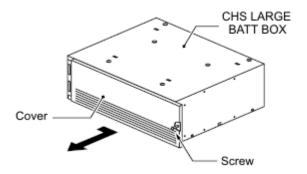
Removing CHS LARGE BATT BOX Cover
